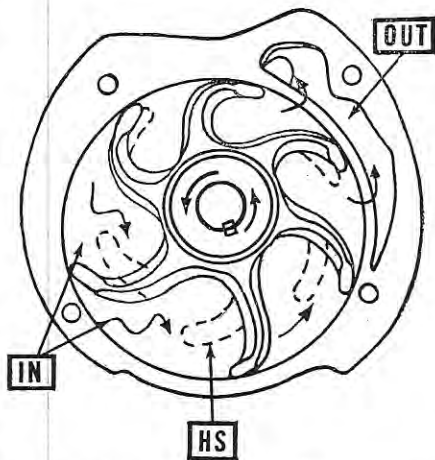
Schematic view of the rubber impeller type water pump used on late models. Impeller mounts on lower unit drive shaft and rotates in offset pump housing. At slow speeds, impeller blades follow outline of housing. Water is drawn into pump (IN) as area between blades increases, and is forced into power head (OUT) as area narrows. At high speeds, blades remain curved as shown by broken lines (HS) and pump operates by centrifugal action.
